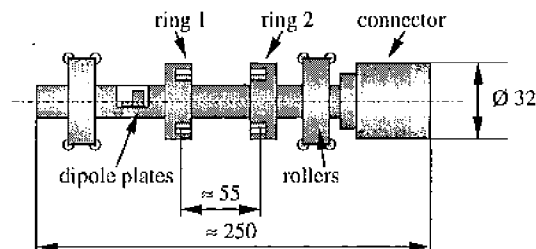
Schematic assembly of the sextupole rings on the support shaft, showing the rollers that support the probe in the warm bore of the magnet, as well as the signal cable connector.
